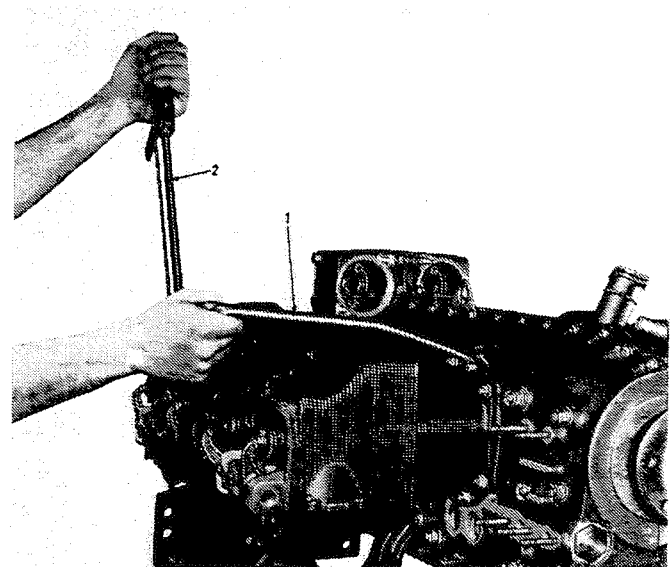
B. TIGHTENING CYLINDER BASE NUT.
